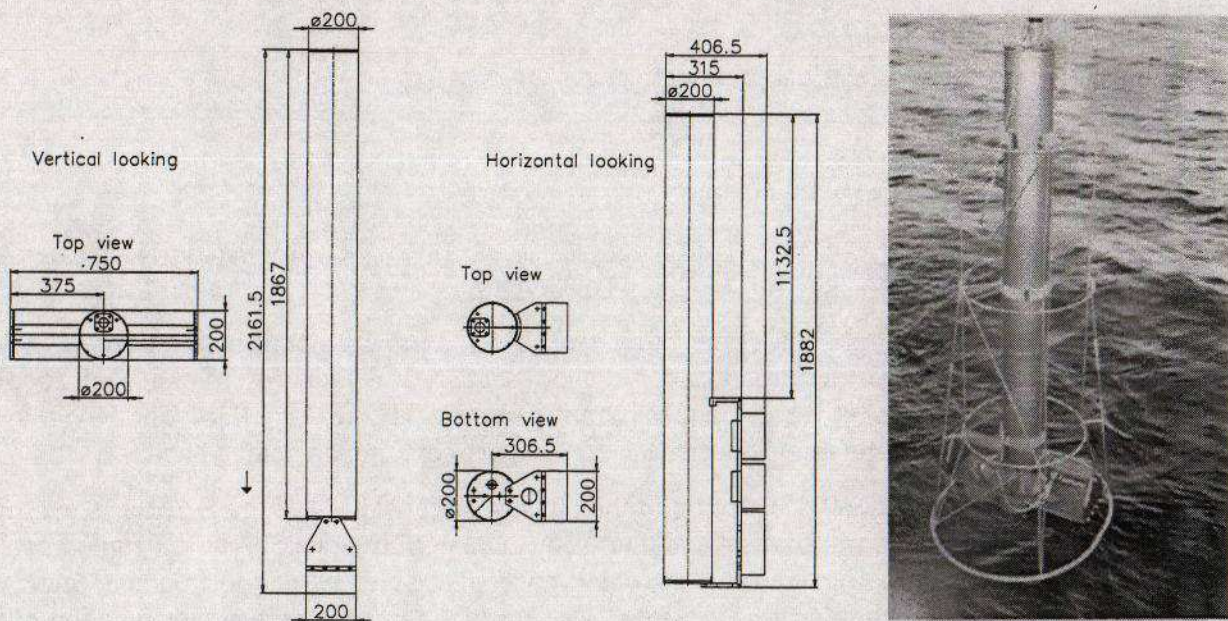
Outline dimension drawing of the BASS system. The drawing on the left shows the BASS system in the vertical-looking configuration. The drawing in the middle shows the BASS system in the horizontal-looking configuration. The picture on the right shows a launch of the system. For each type of deployment the system is used as a probe.
